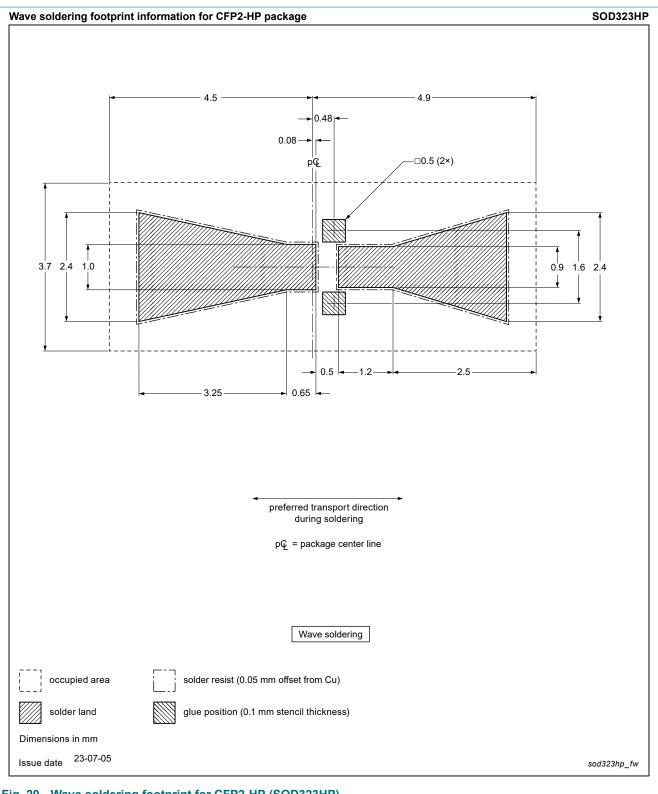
Wave soldering footprint for CFP2-HP (SOD323HP)
